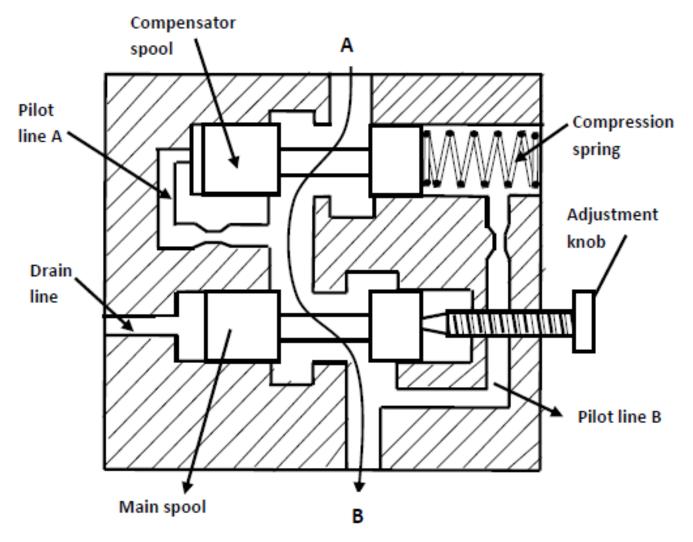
Sectional view of a pressure-compensated flow-control valve.
